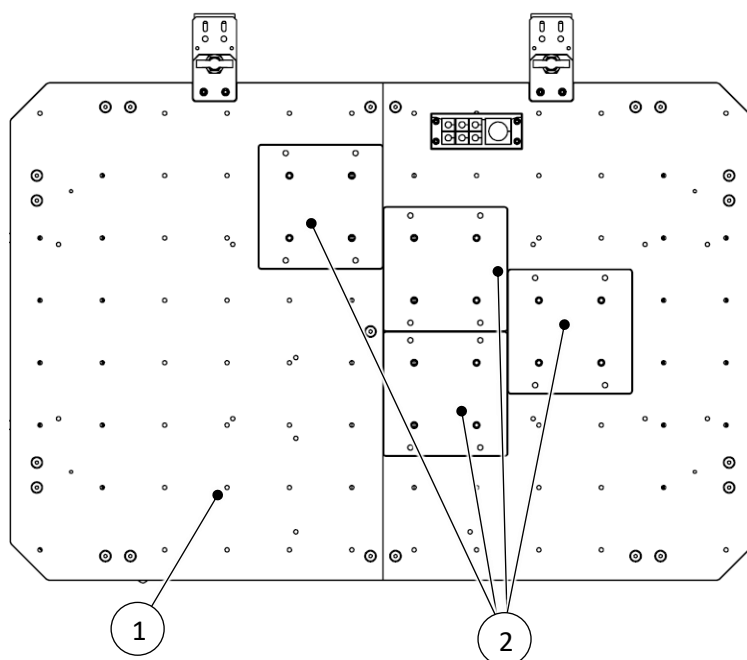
Positions for HORST600 on the Mounting surface of the MRB M
